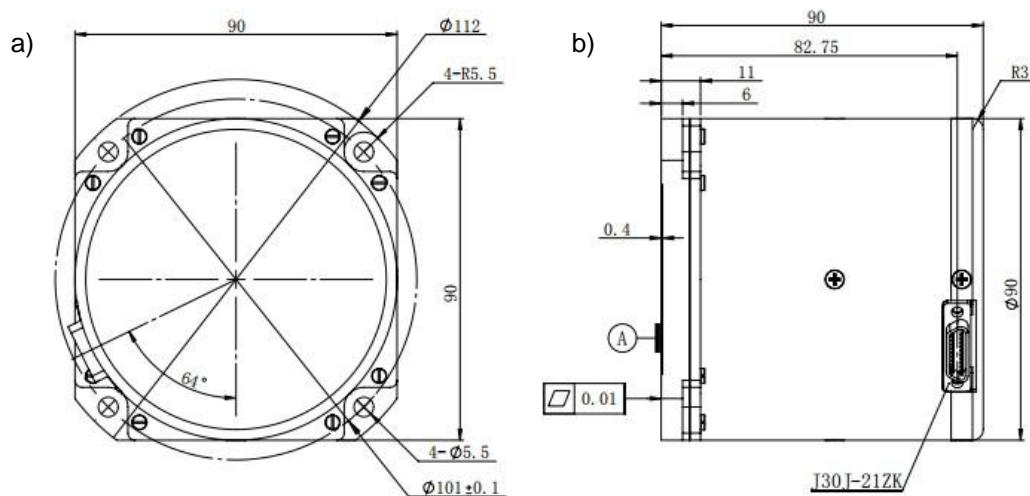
Mechanical dimensions 90x90x90 a) Top view b) Side view
